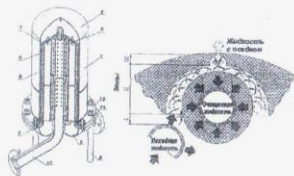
Membrane apparatus with directed flows: three-dimensional model of membrane apparatus with directional flows: 1 - cylindrical shell, 2 - elliptic lid, 3 - elliptical bottom, 4 - filter holder, 5 - perforated distributor, 6 - filter elements, 7 - clamping plate,
